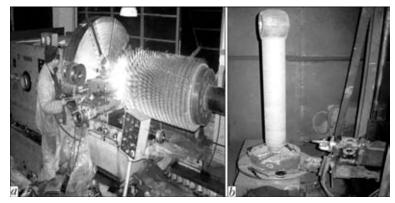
Spray-deposition of coating on supporting journal of turbine shaft (a) and hydraulic cylinder rod (b)
